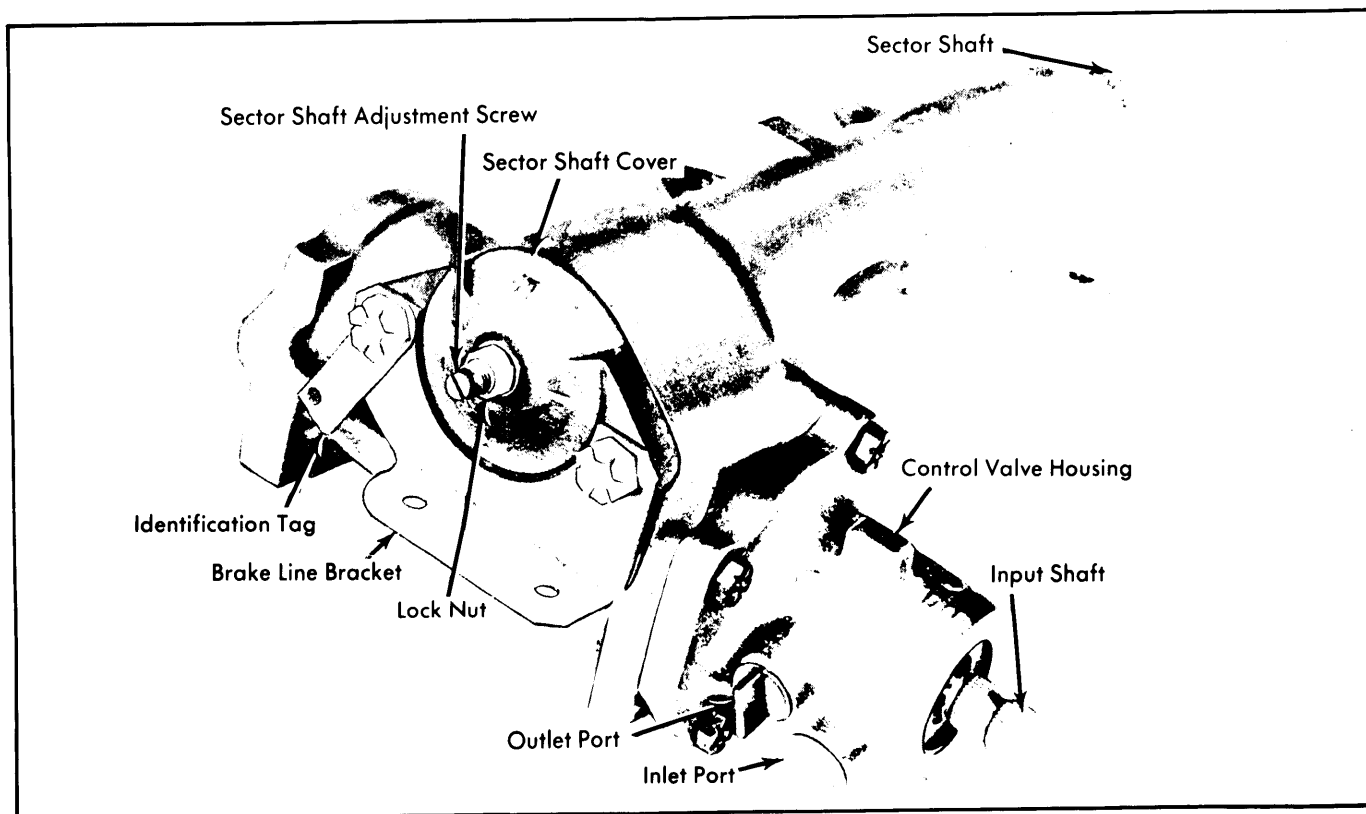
Ford Torsion Bar Steering Gear Assembly
